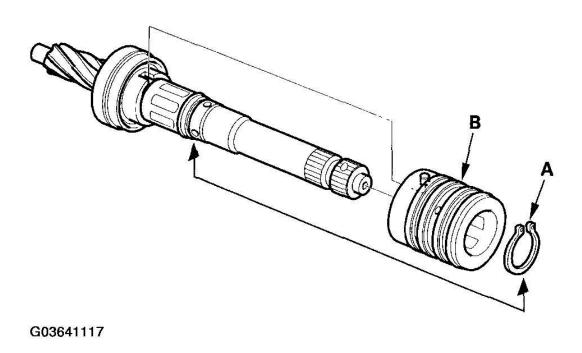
Removing Snap Ring And Sleeve From Pinion Shaft Courtesy of AMERICAN HONDA MOTOR CO., INC.
